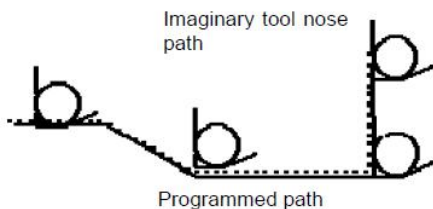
the imaginary tool nose path is the same that of programmed path without tool radius compensation
